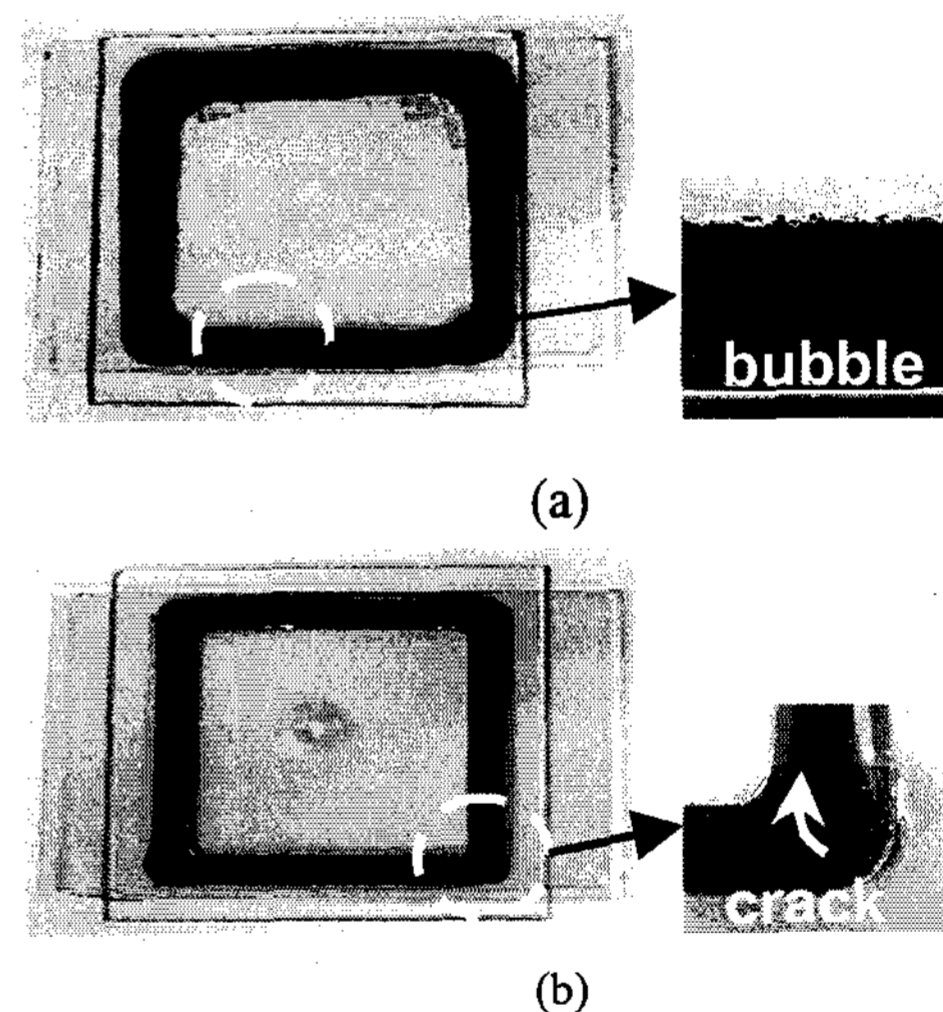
Pictures showing frit glass surface resulting in (a) bubbles, and (b) crack.
